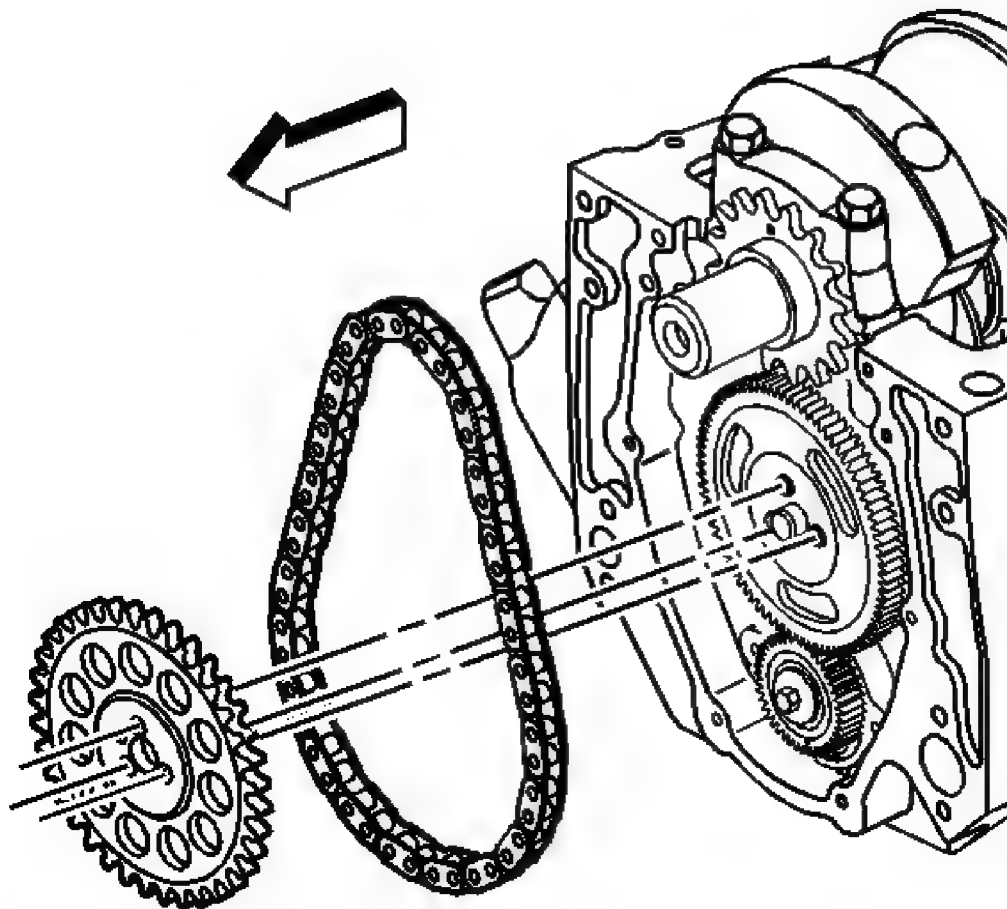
View Of Camshaft Sprocket & Camshaft Timing Chain
